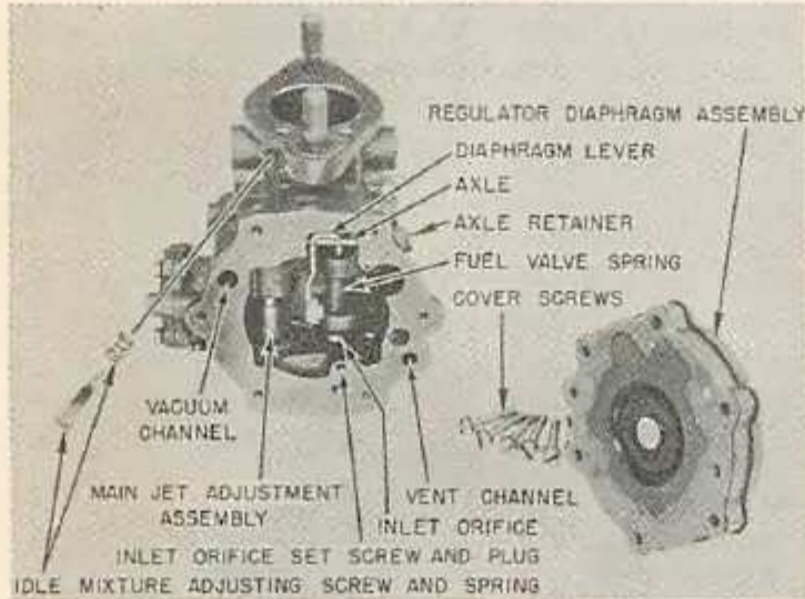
Zenith LP-Gas pressure regulating carburetor shown with diaphragm assembly removed.
